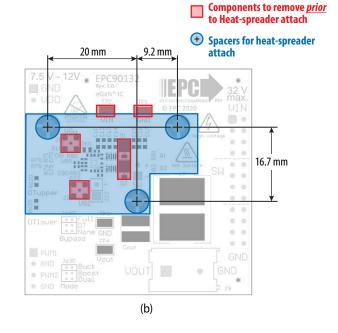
Details for attaching a heatsink to the EPC90132 board.
